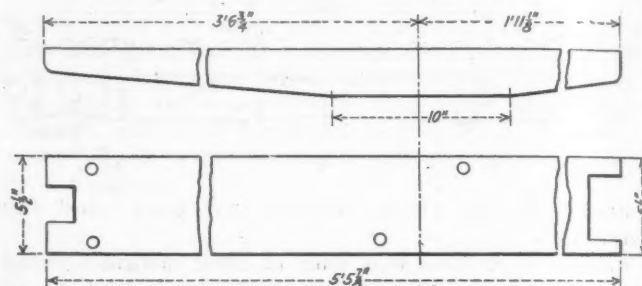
A Heavy Guide or "Motion Bar" Finished by Grinding
